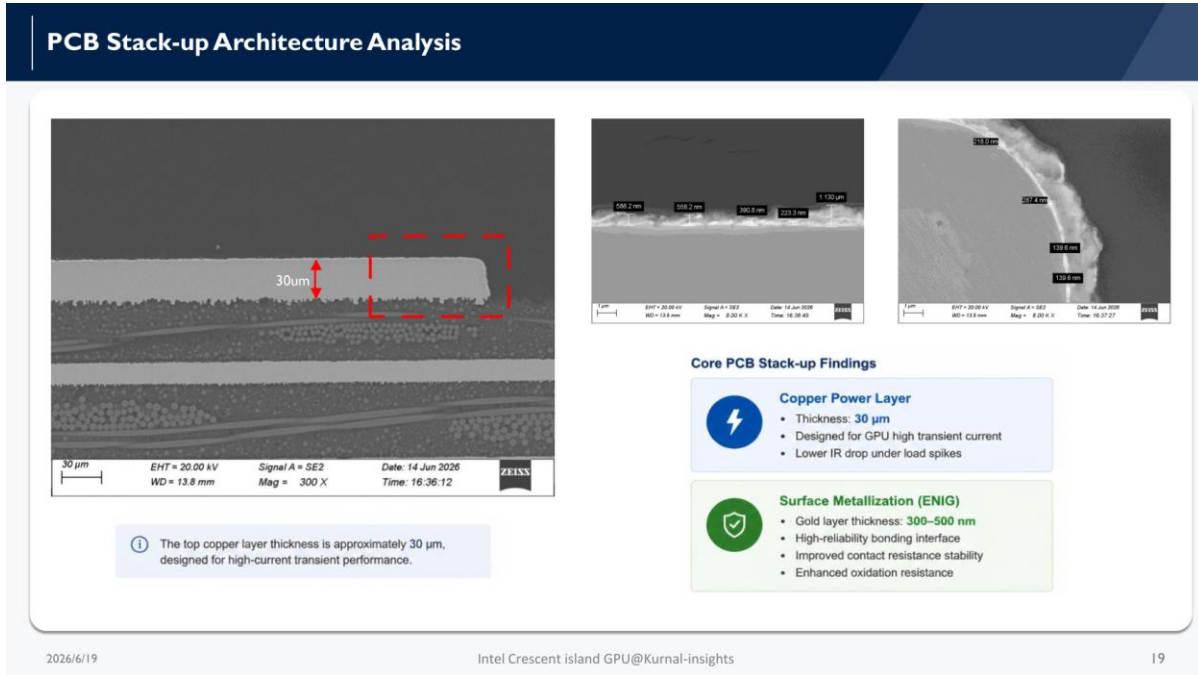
PCB edge cross-section – ~30 μm outer copper and ENIG surface finish.
